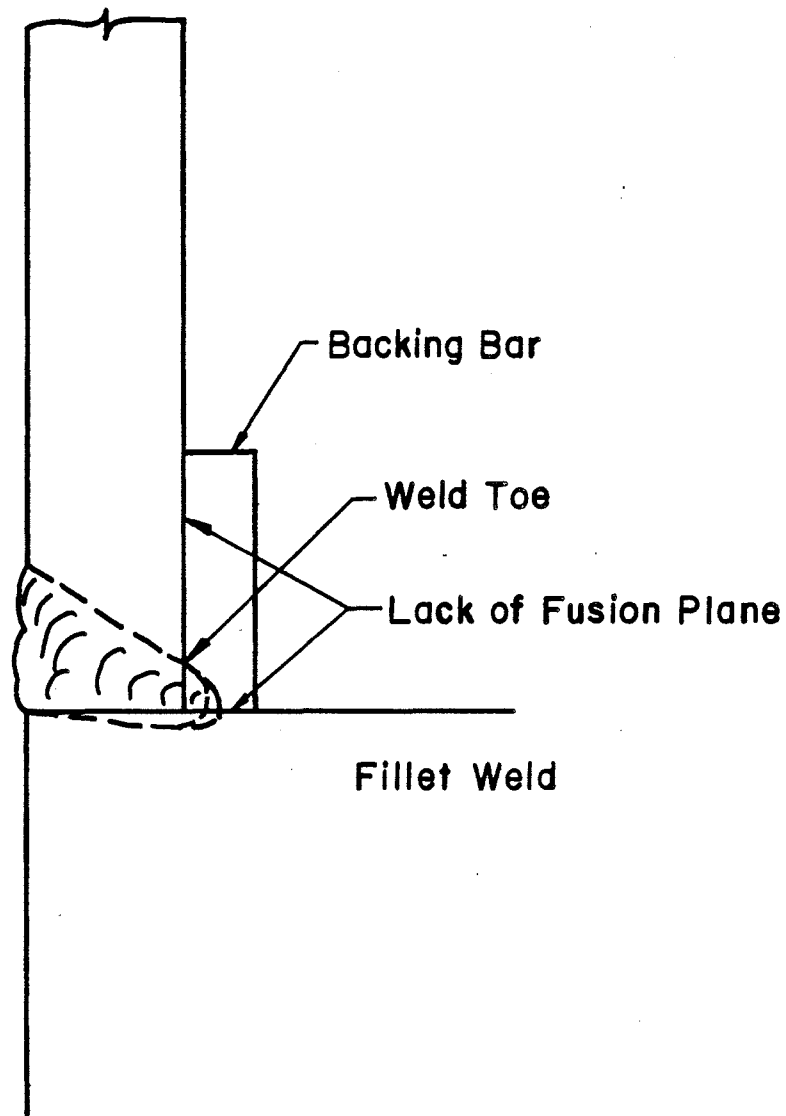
Schematic of Box Corner Weld and Backing Bar Showing Lack of Fusion Planes
